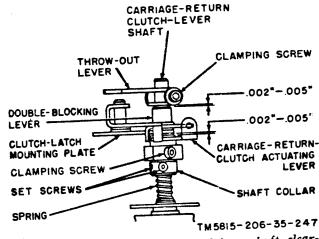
Carriage-return clutch-lever-shaft clearance adjustment (TT-4B/TG).
